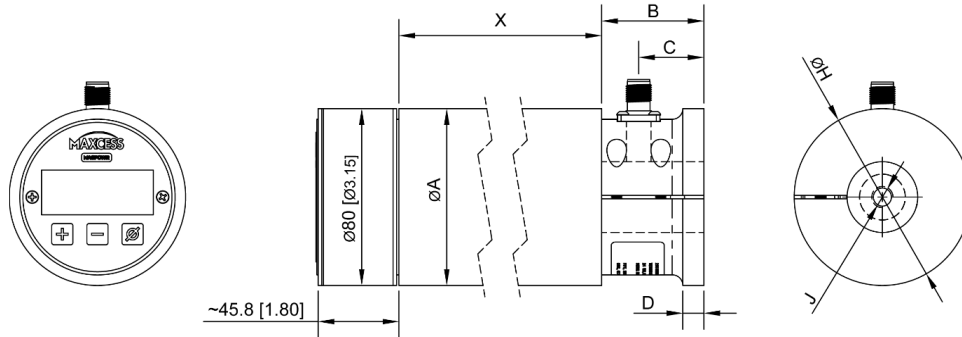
Stud mount Note: For 80 mm diameter rollers of all styles, the electronics housing is external to the roller body. The housing has a diameter of 80 mm and extends out approximately 45.8 mm (1.80 inches)
